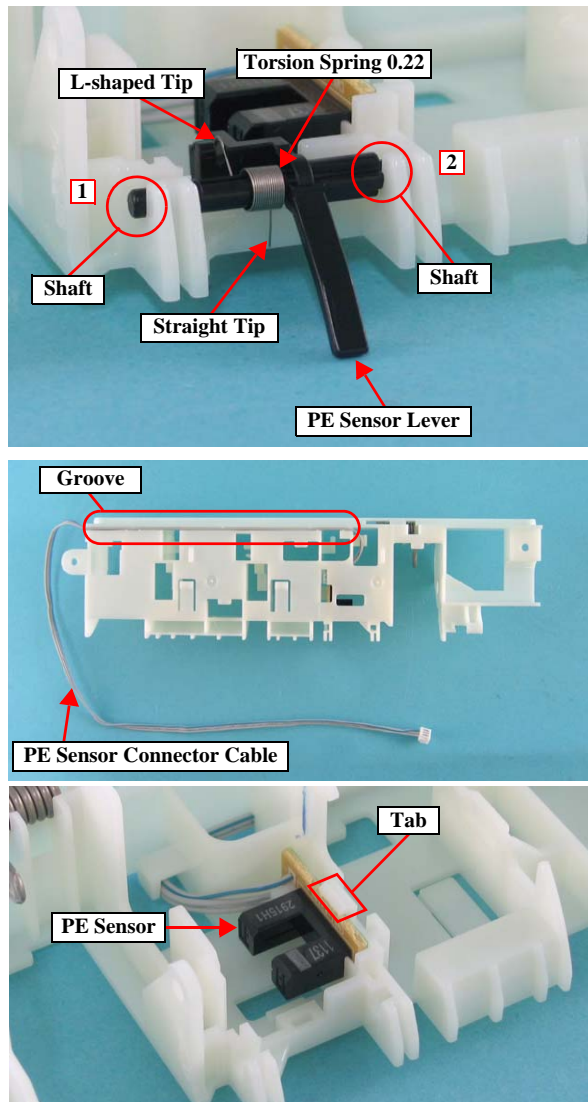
Removing PE Sensor Board/PE Sensor Lever
